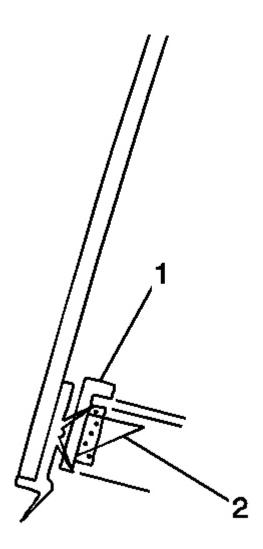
Identifying Window Frame & Urethane Adhesive Bead Courtesy of GENERAL MOTORS CORP.
